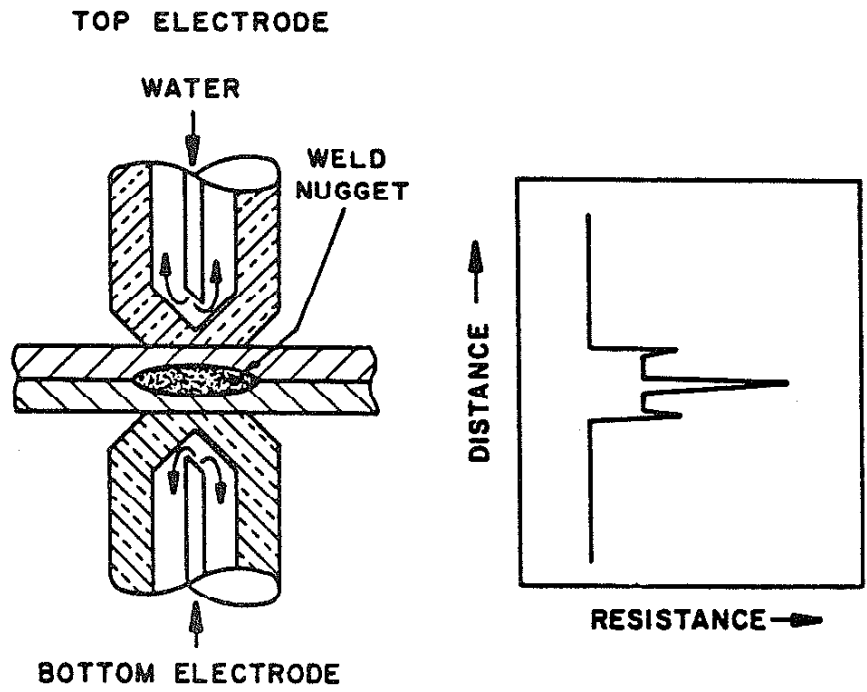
Schematic Diagram of the Spot Welding Process
